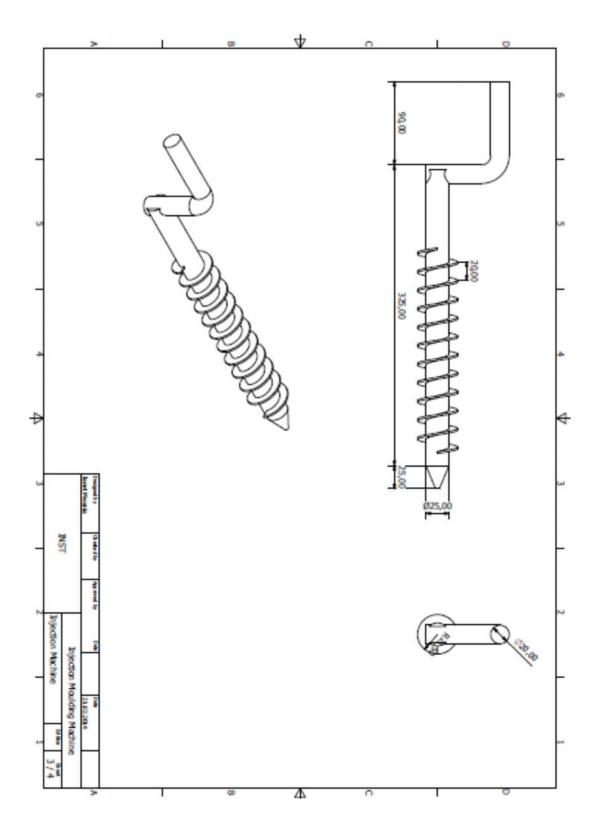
The Screw in 3D and End and front elevations showing dimensions
